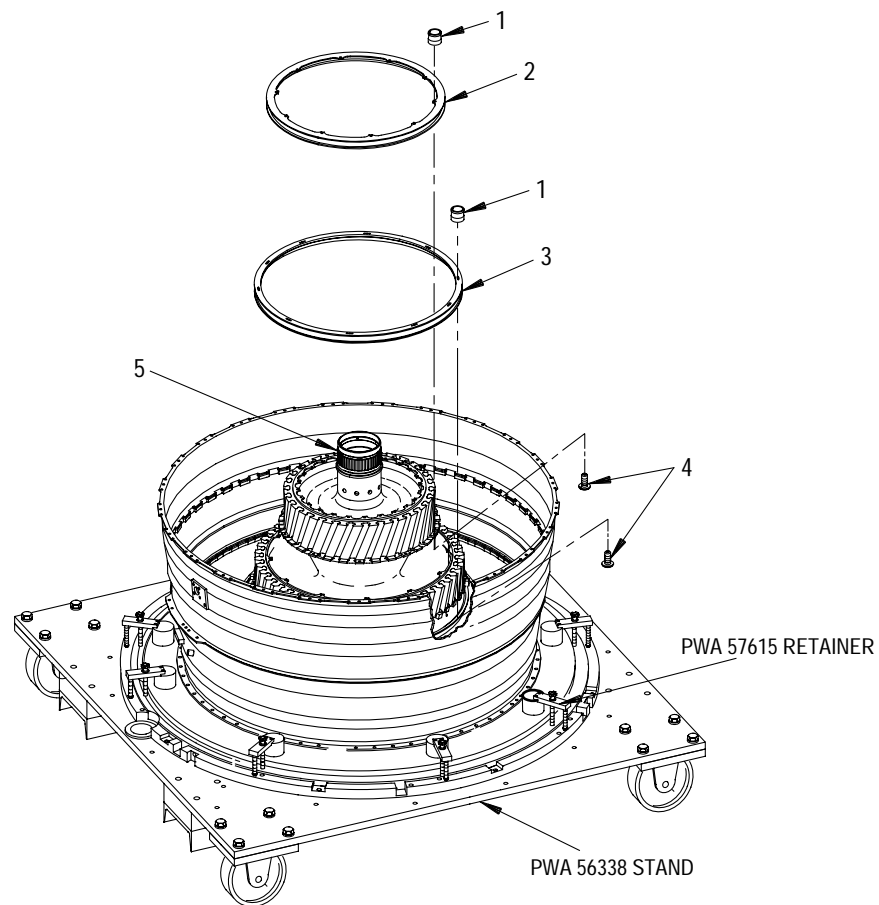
Second Stage Fan Air Seal and Second Stage Compressor Stator Assembly - Removal
